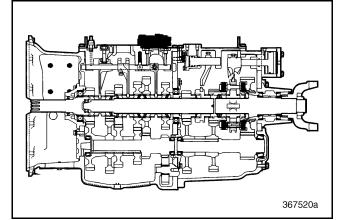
Range Shift Valve Component Locator (T313L21/T318L21 Shown)
